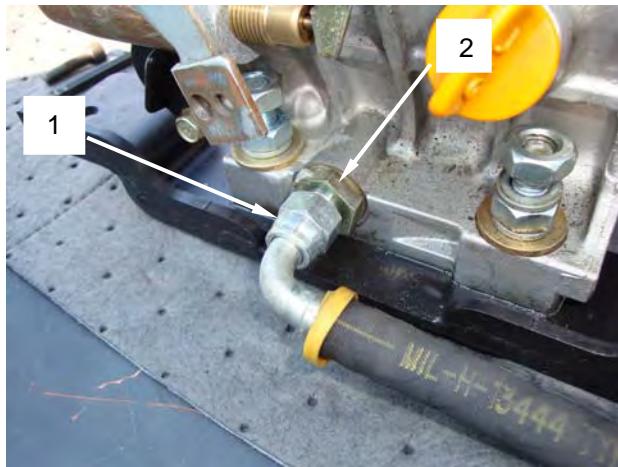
Remove Engine Drain Hose and Drain Fitting.
